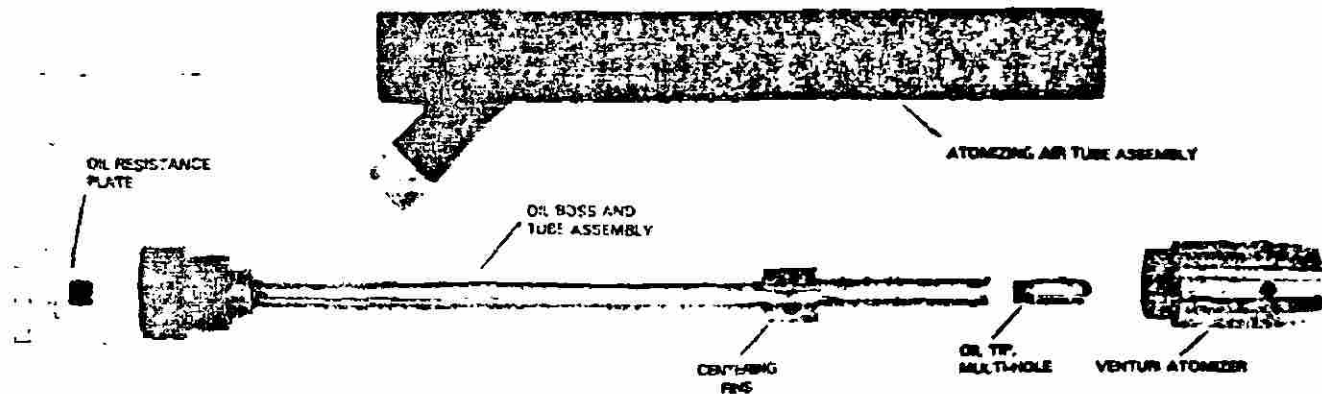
DISASSEMBLY OF OIL BURNER (DUAL FUEL TYPE)
